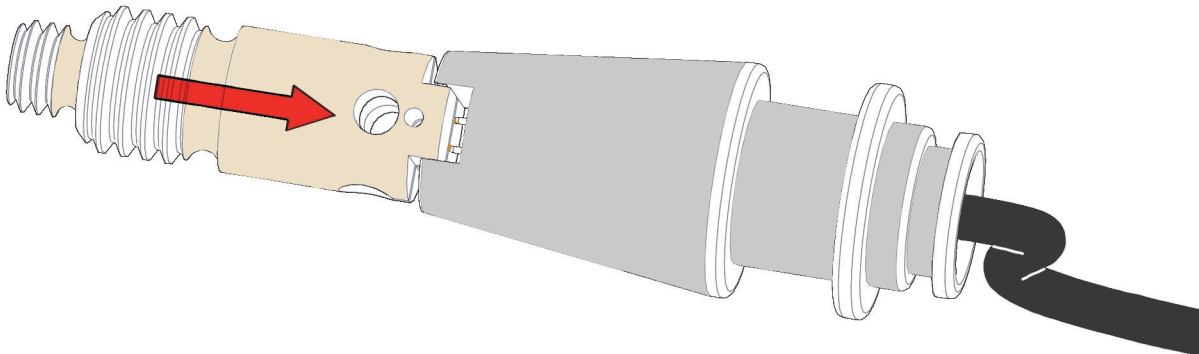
Sliding the threaded PEEK stud into the release housing
